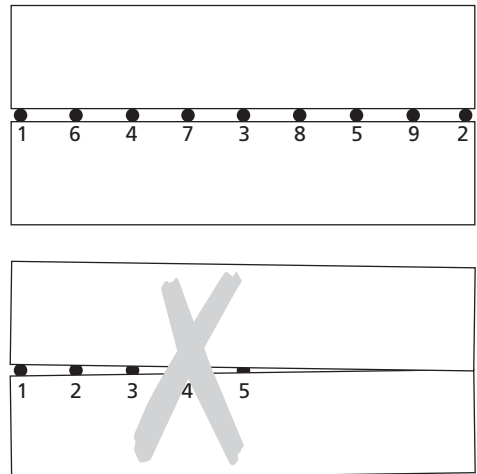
To avoid plate movement, tacks should be welded from each end alternately
